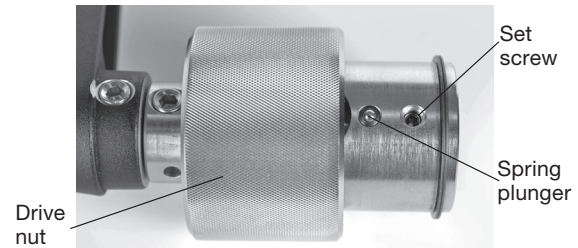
Retracting the drive nut (second screw is on other side of housing)
